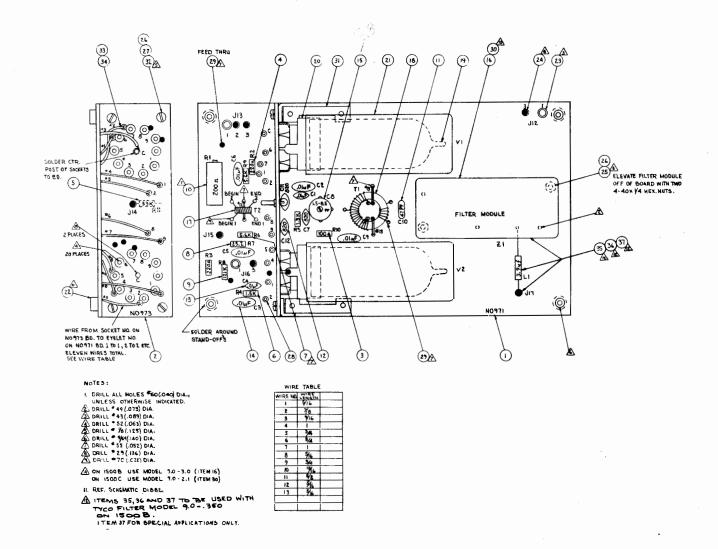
Mixer Board Assembly N0971-J2 thru J16-D2145C
